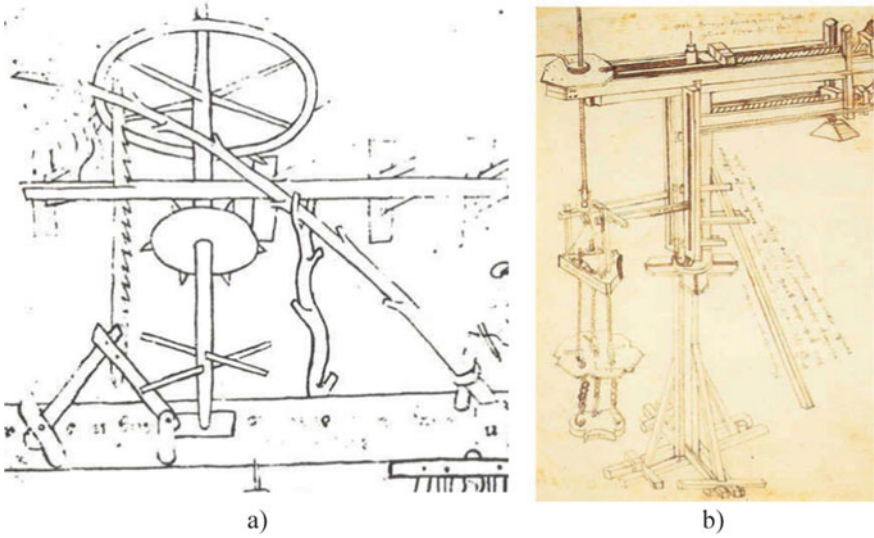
Examples of modern-like mechanism design form the past: a automatic wood sawing machine of thirteenth century with a four-bar or five-bar mechanism coupler guiding the saw; b a crane design of 14th century with belt system as cable parallel manipulator for load handling
